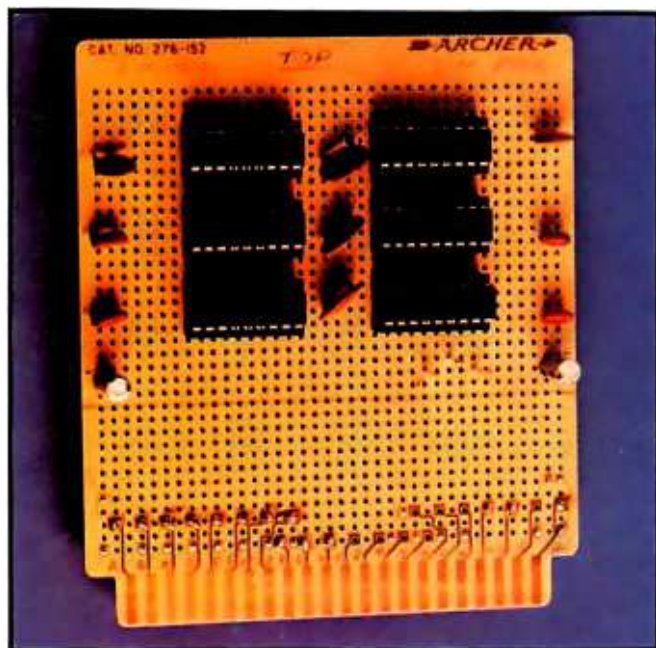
A 3K-byte RAM board for the VIC-20 computer. This view shows the component side of the board and the parts layout. The circuit wiring, done with wirewrap technique, is on the opposite side.
